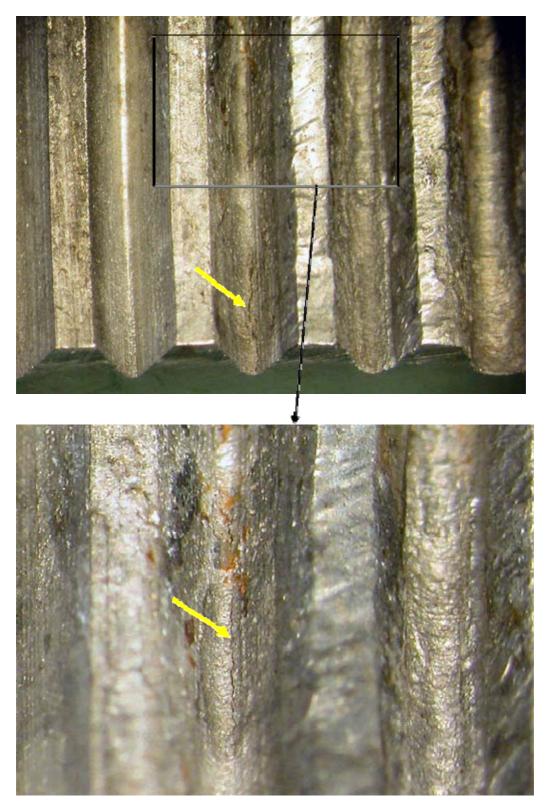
Light optical view of cracks in thread bottom of last engaged thread.
